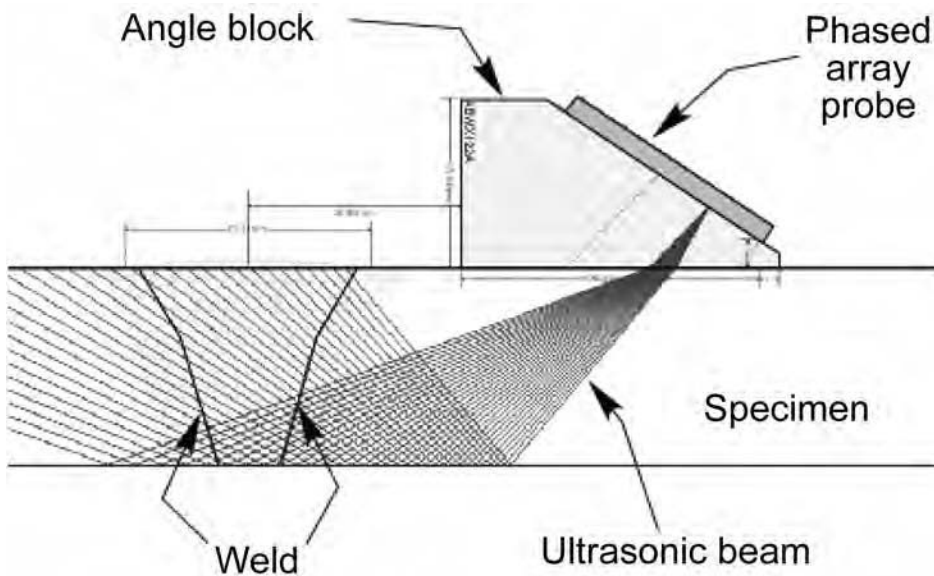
Setup for the shear wave weld inspection technique with an angle beam wedge and a 5 MHz 60-element linear phased array probe
